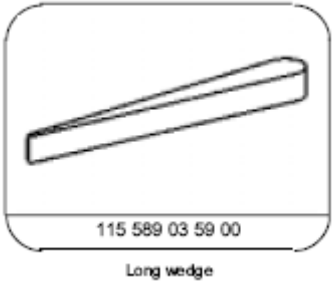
Identifying Long Wedge (115 589 03 59 00)
